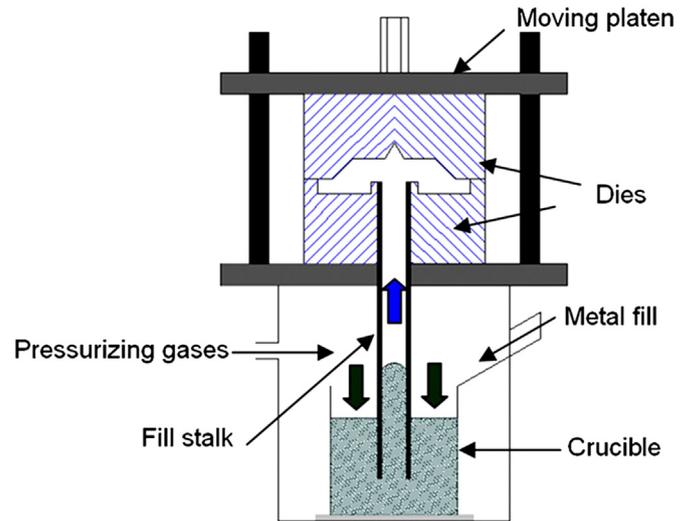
A schematic diagram of a typical low pressure casting machine [17].
